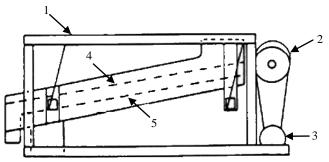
Component Parts of an Oscillating Pellet Scalper 1) Frame; 2) Drive; 3) Motor; 4) Top Screen for Finished Pellets and for Rejection of Larger-Than-Desired Crumble Particles; 5) Bottom Screen for Finished Crumbles
